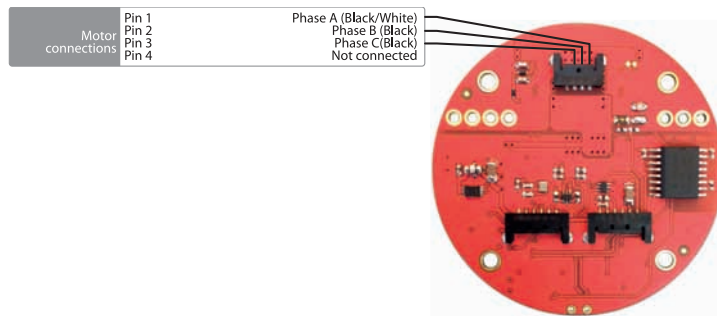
SF40 Controller PCB bottom: Motor connections
